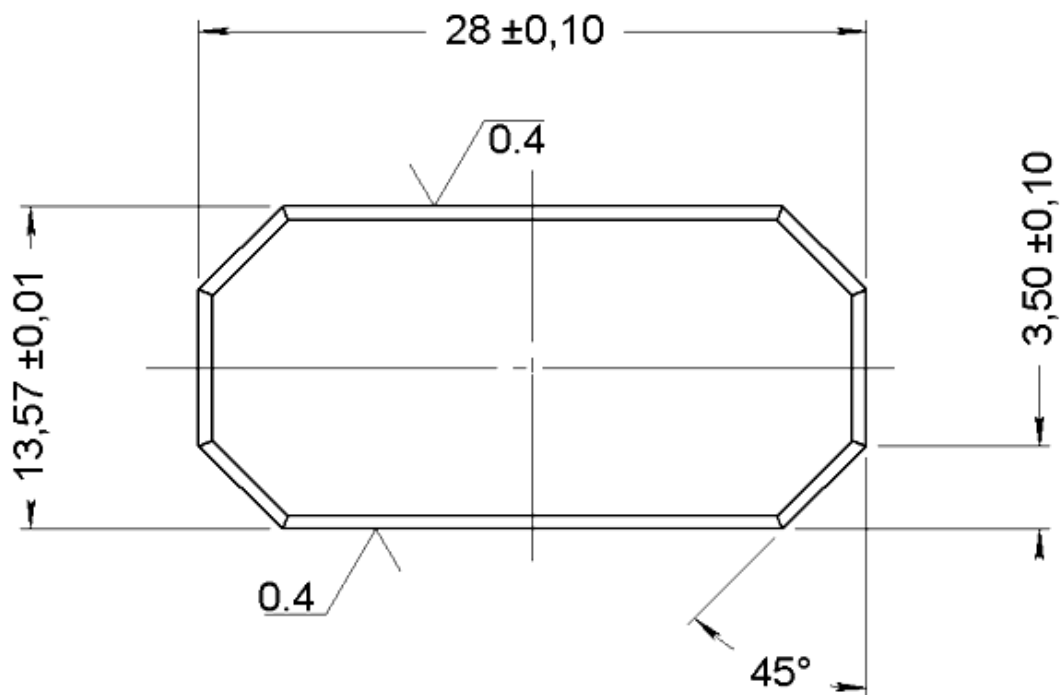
Sizing gauge for disconnect panel AC connector cavities
